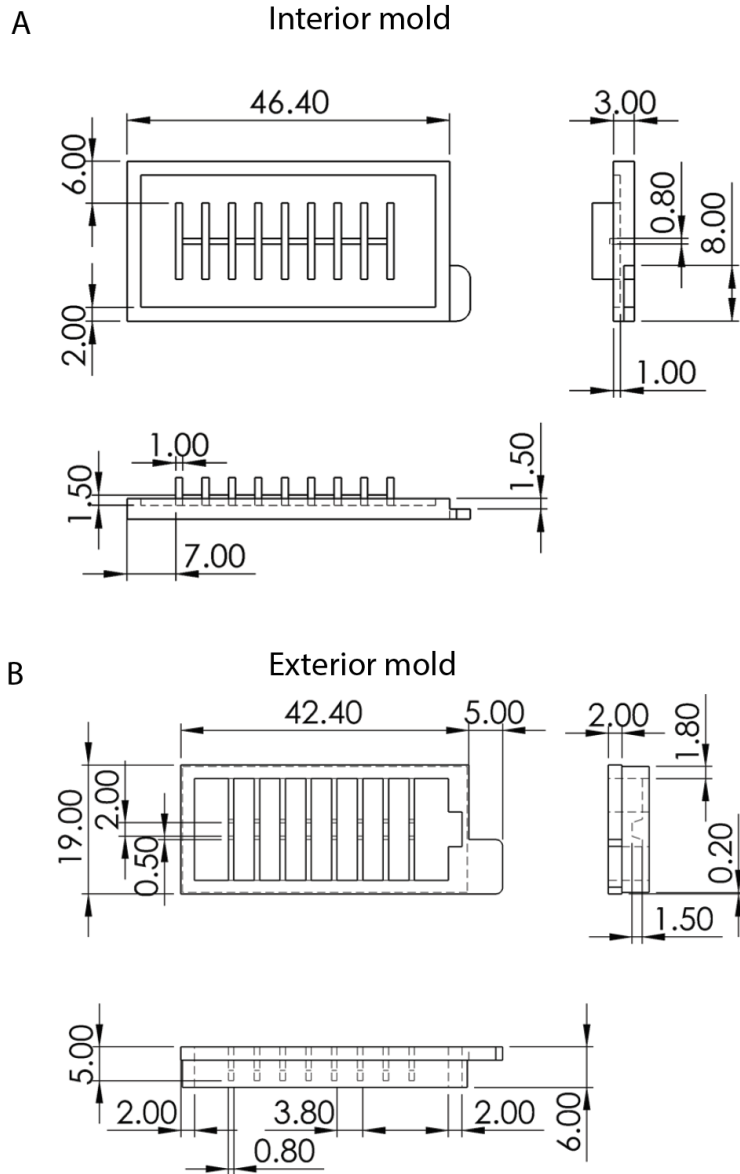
Molds for the fabrication of the antagonistic pneumatic bending pair. (A) Dimensions (mm) for the interior mold for the pneumatic bending unit. Shown are 2D drawings of the top, side, and front views. (B) Dimensions for the exterior mold for the pneumatic bending unit. Shown are 2D drawings of the top, side, and front views.
